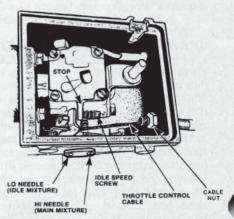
A - View of brushcutter air box. Outside throttle cable nut is not shown.
